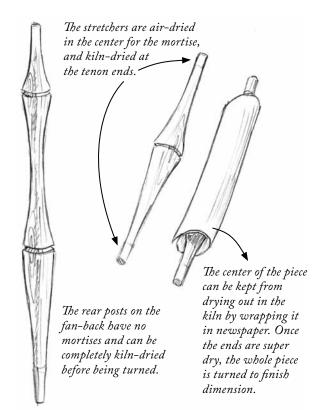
Some parts should be selectively kiln-dried for joinery.
